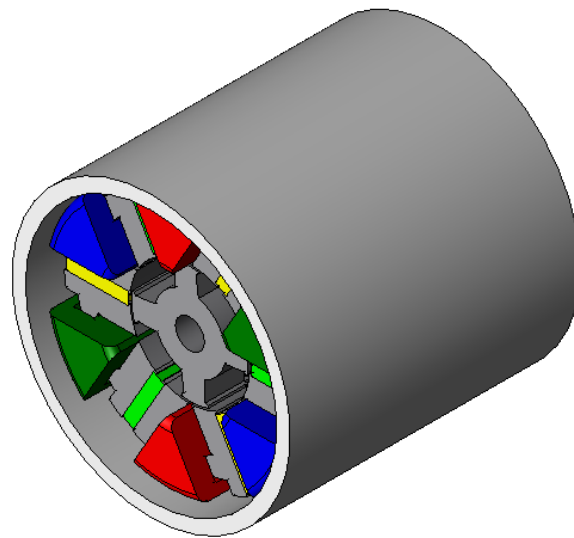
Geometry of the dual-stator 6/4 FSPM machine with single-layer toroidal winding
